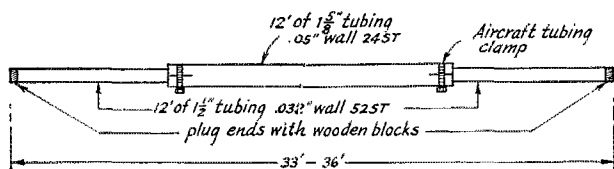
A typical element, made by telescoping 12-foot lengths of tubing. The overlaps are treated to insure good electrical connection. (See text.)
